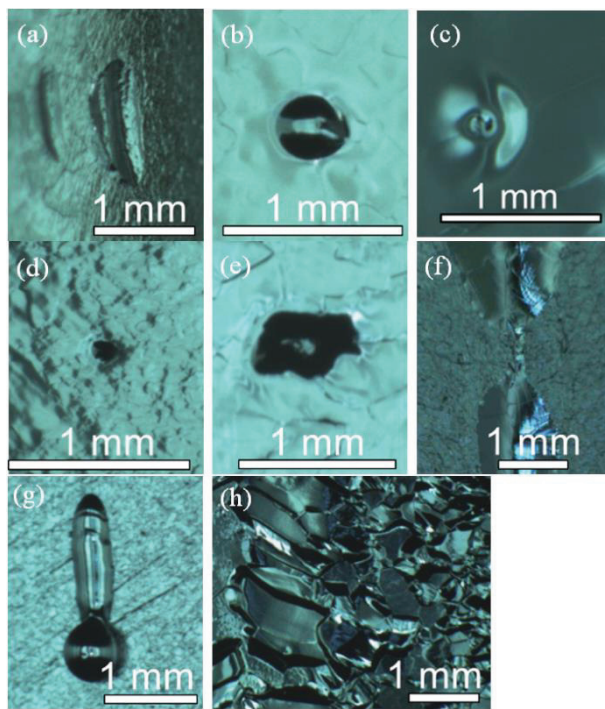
Typical surface defects on series EXFEL and ILC-HiGrade cavities: (a) scratches, (b) “cat eyes”, (c) etching pits, (d) pits, (e) foreign inclusions, (f) incomplete welding, (g) welding spatters, and (h) rough polishing.
